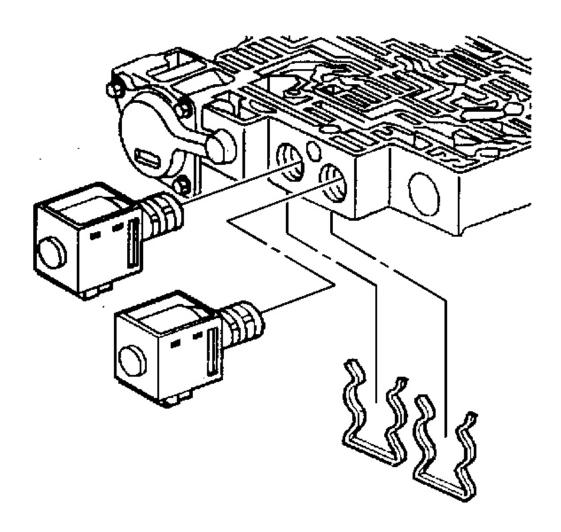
View Of 1-2 & 2-3 Shift Solenoids & Retainers Courtesy of GENERAL MOTORS CORP.
